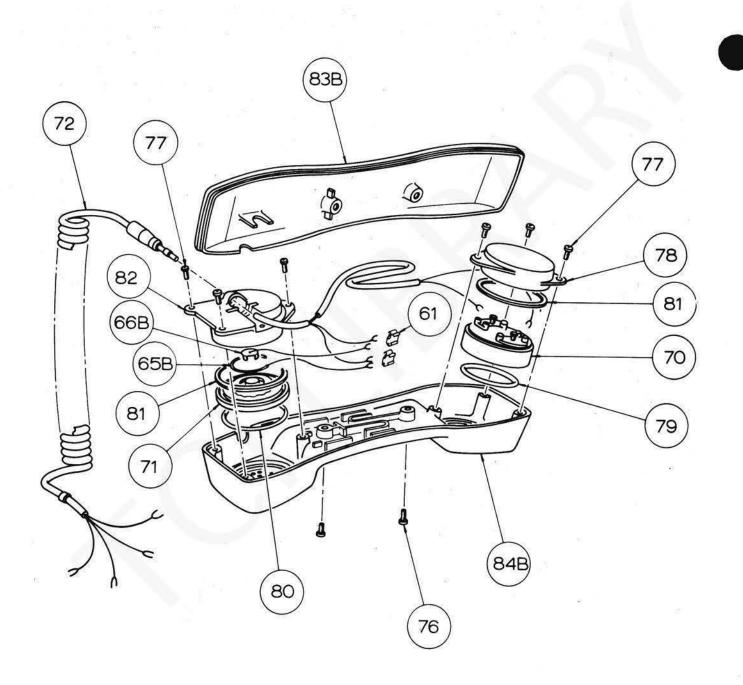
Chestphone Handset - Assembly of Parts (Table N)
